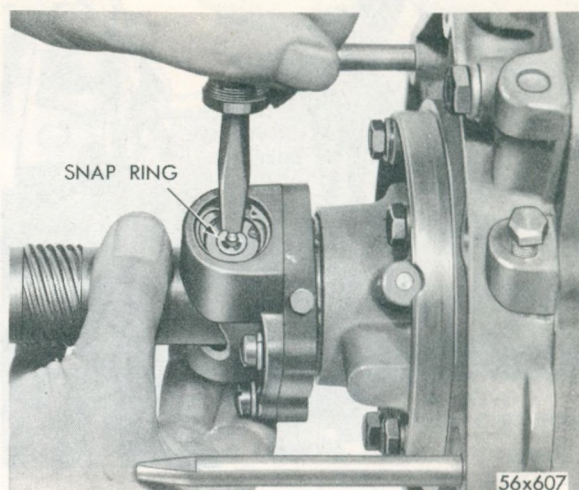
Removal and Installation of Governor Valve Shaft Snap Ring
